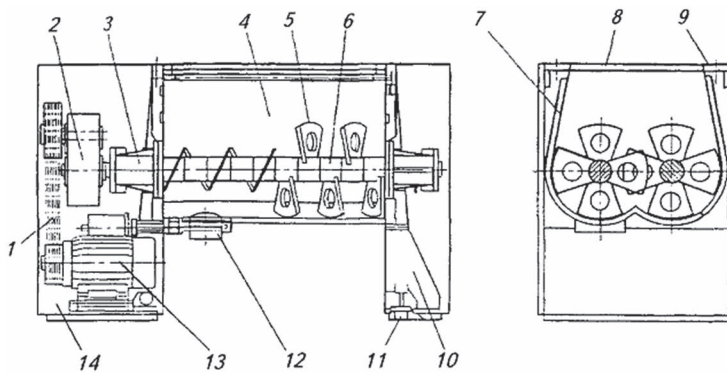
Mixer circuit SMKN: (1) V-belt transmission; (2) gearbox; (3) shaft support; (4) working chamber; (5) the blade; (6) shaft; (7) shirt; (8) lattice; (9) cover; (10) bed; (11) sensor; (12) inlet; (13) electric motor; (14) drive housing.
